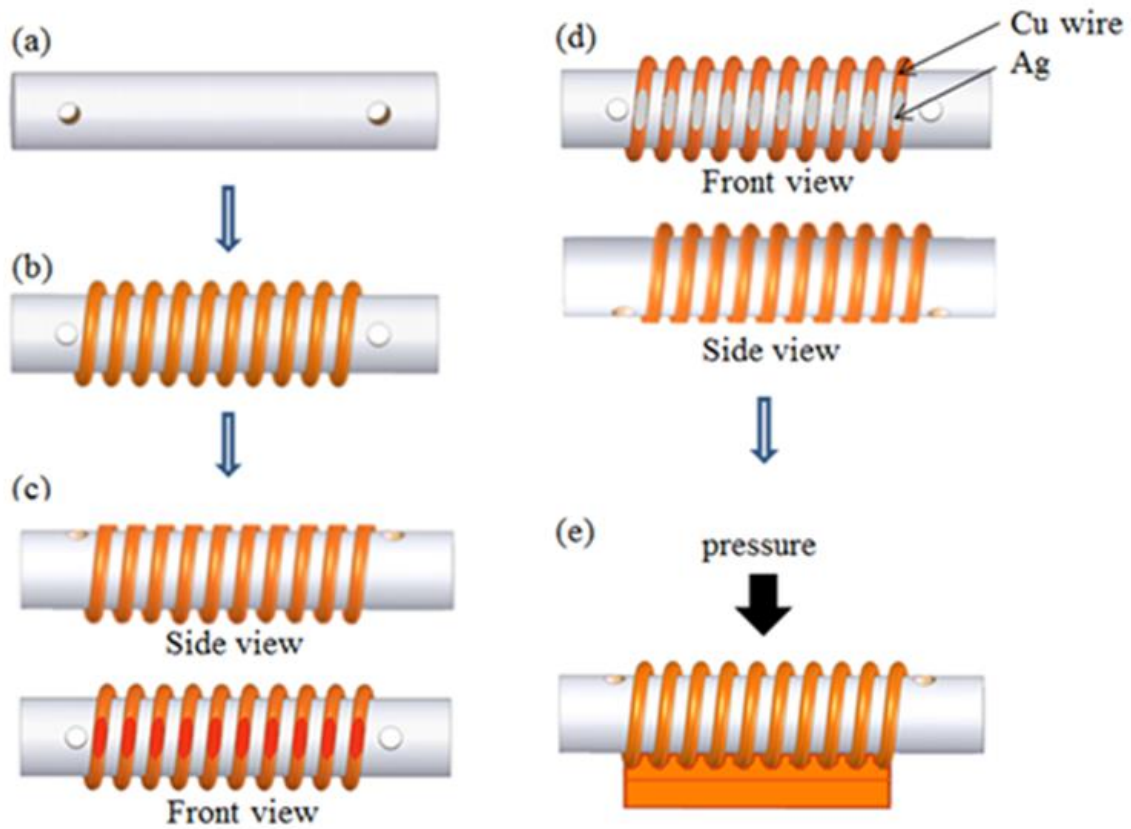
Fabrication steps to bond flat surfaces of a Cu coil on a Si chip or Cu substrate using solid-state bonding process: (a) 12.7 mm (0.5 inch) diameter MACRO core with groove, (b) winding 1 mm Cu wire on the groove and coating the assembly with lacquer, (c) machining the coil to produce flat surfaces on the wire, (d) electroplating 50 μm Ag on the flat surfaces of Cu wire, removing lacquer, and annealing at 350 $^{\circ}\text{C}$ for 5 h, (e) solid-state bonding at 300 $^{\circ}\text{C}$ with 6.89 MPa in 1.33×10^{-5} MPa vacuum for 3 minutes.
